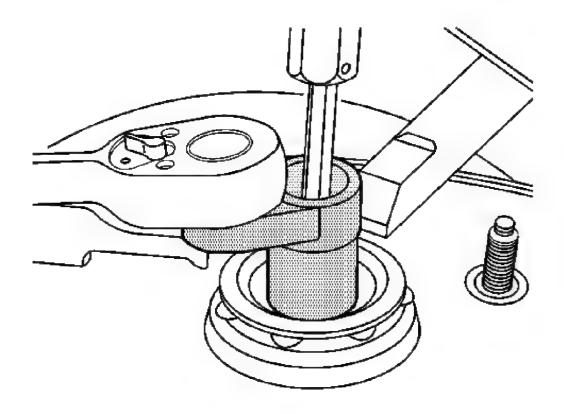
Removing/Installing Strut Retaining Nut Courtesy of GENERAL MOTORS CORP.
